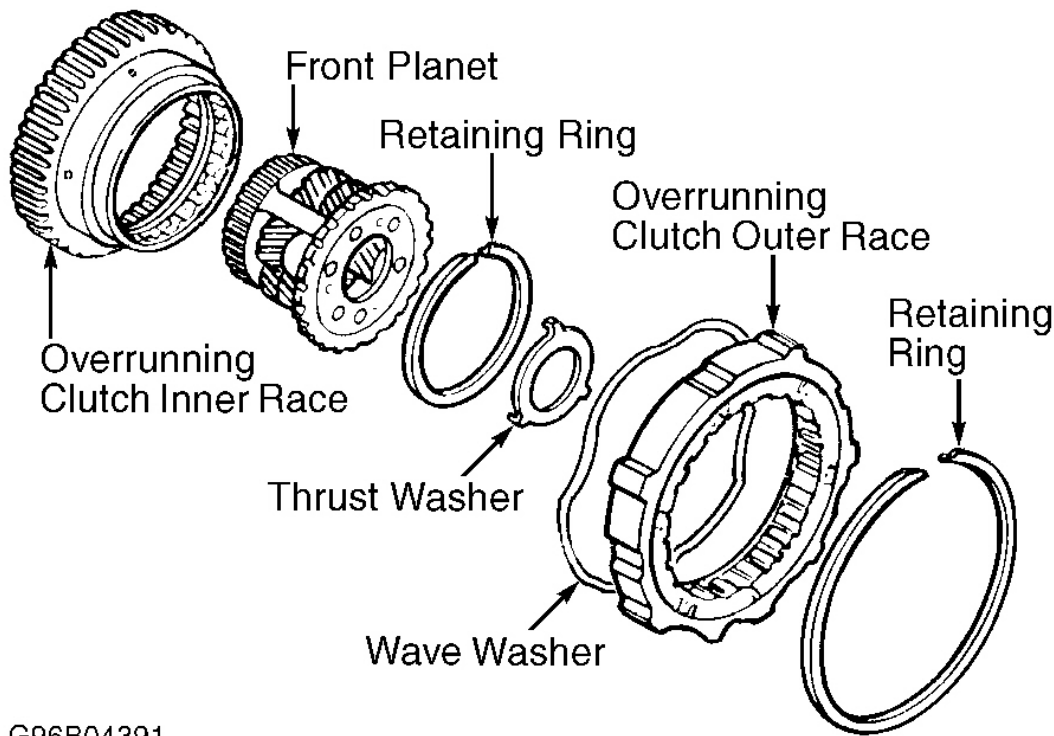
Exploded View Of Primary Sun Gear & One-Way Clutch
